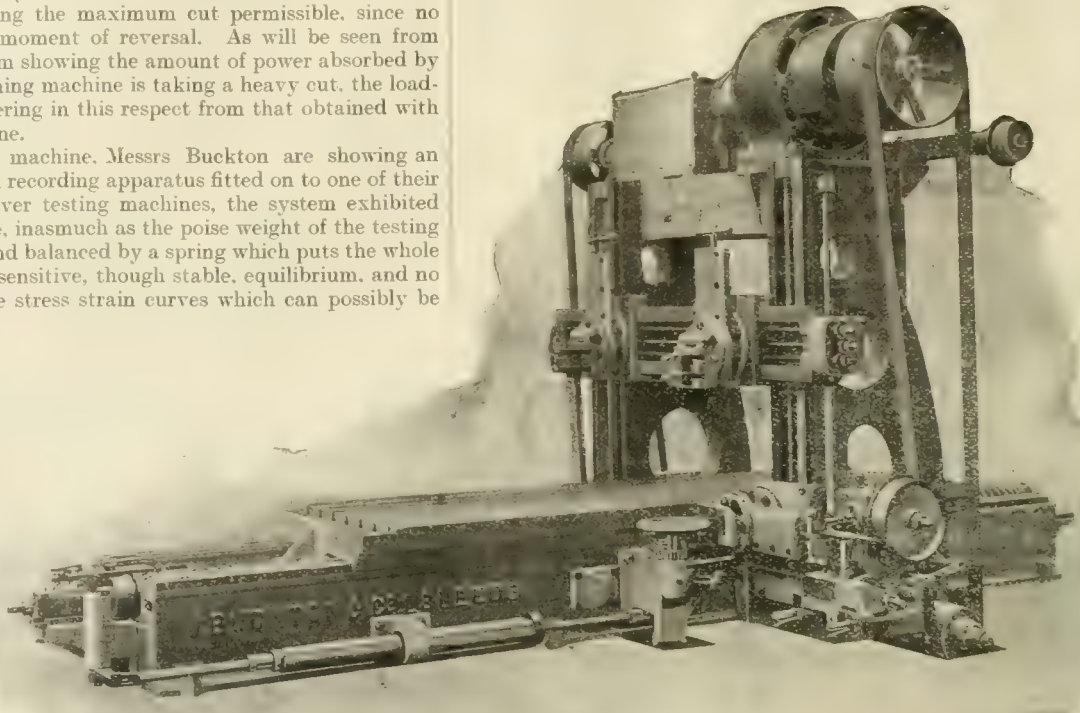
REGENERATIVE PLANING MACHINE BY MESSRS. J. BUCKTON & CO.
